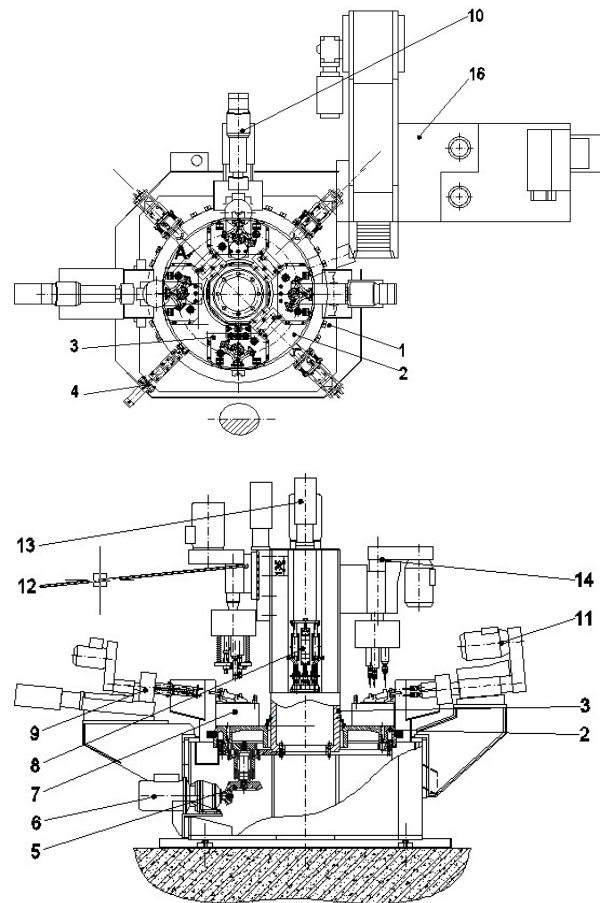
Generally drawing MRICC 8 × 1250 – 6U CNC.
